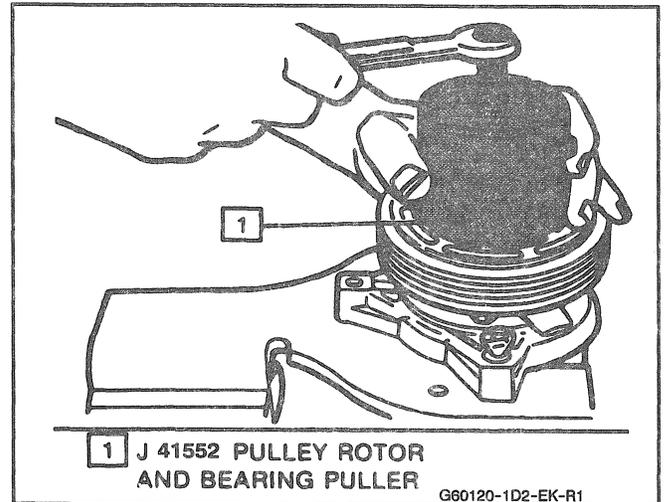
Removing Pulley Rotor and Bearing Assembly
